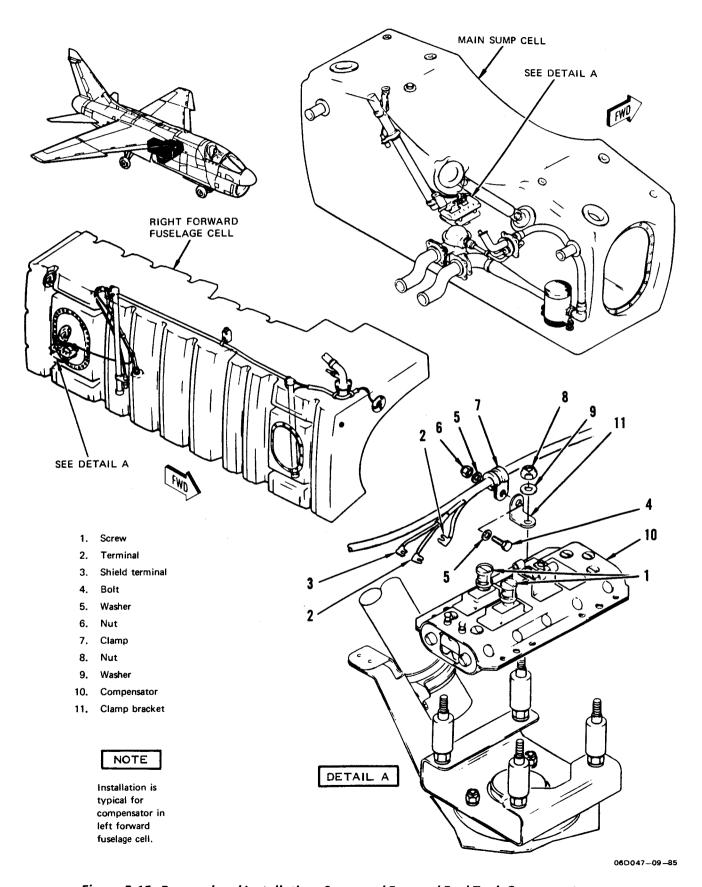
Removal and Installation; Sump and Forward Fuel Tank Compensator
